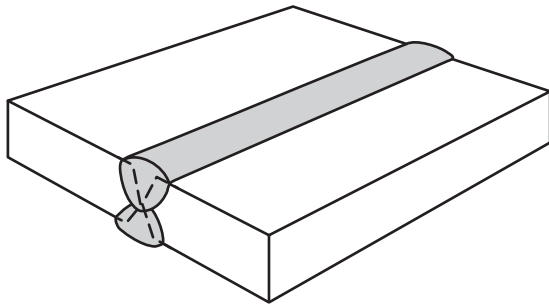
(Continued)—Single-Groove Weld Types
